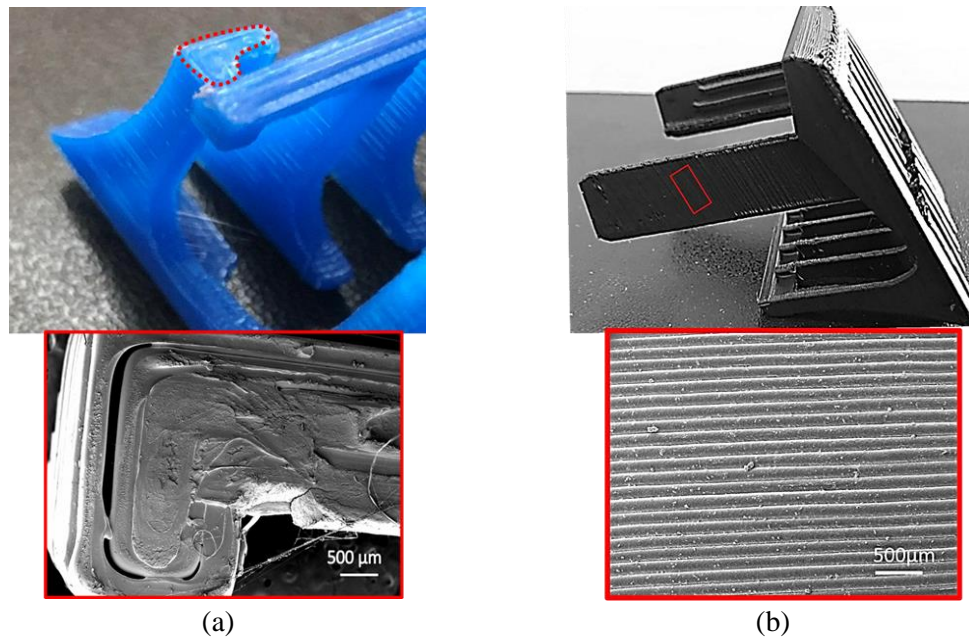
SEM images: (a) neat surface of ABS 3D printed part: (b) fracture surface PLA 3D printed part
